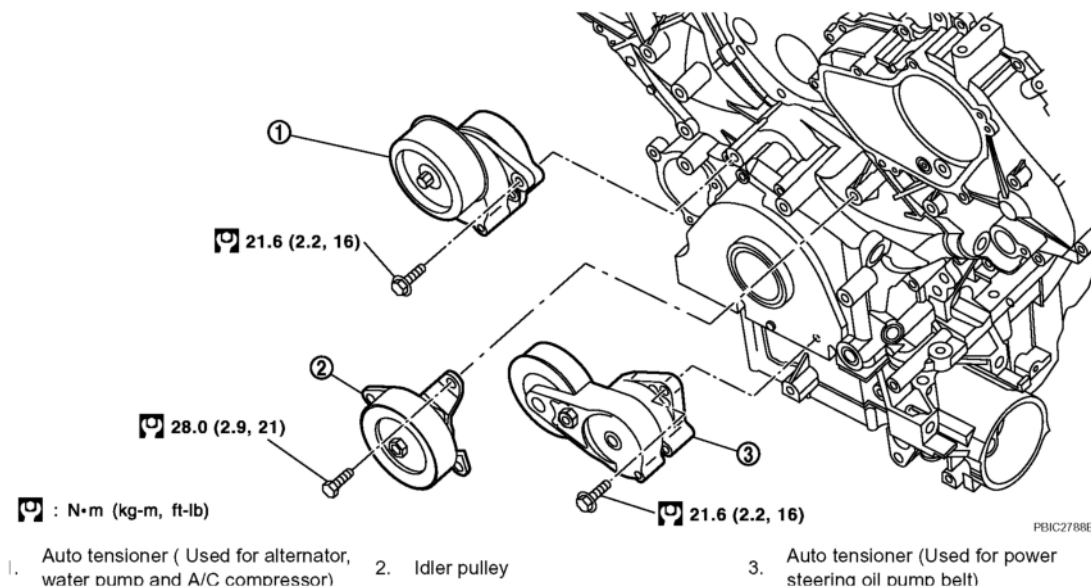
Identifying Drive Belts Auto-Tensioner And Components With Torque Specifications
